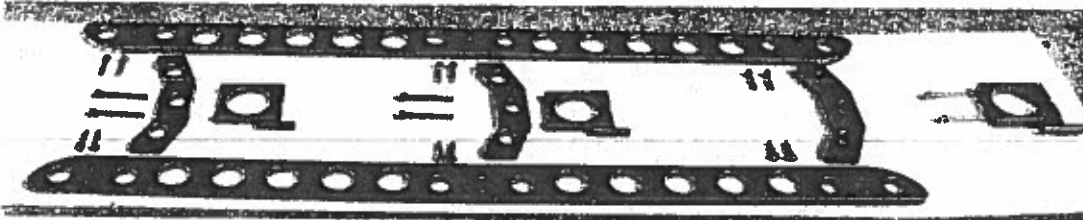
Sled components laid out prior to assembly. Note that forward cross-member is thicker than middle and rear cross-members, and forward clamp has a larger-diameter central hole than rear clamps.
